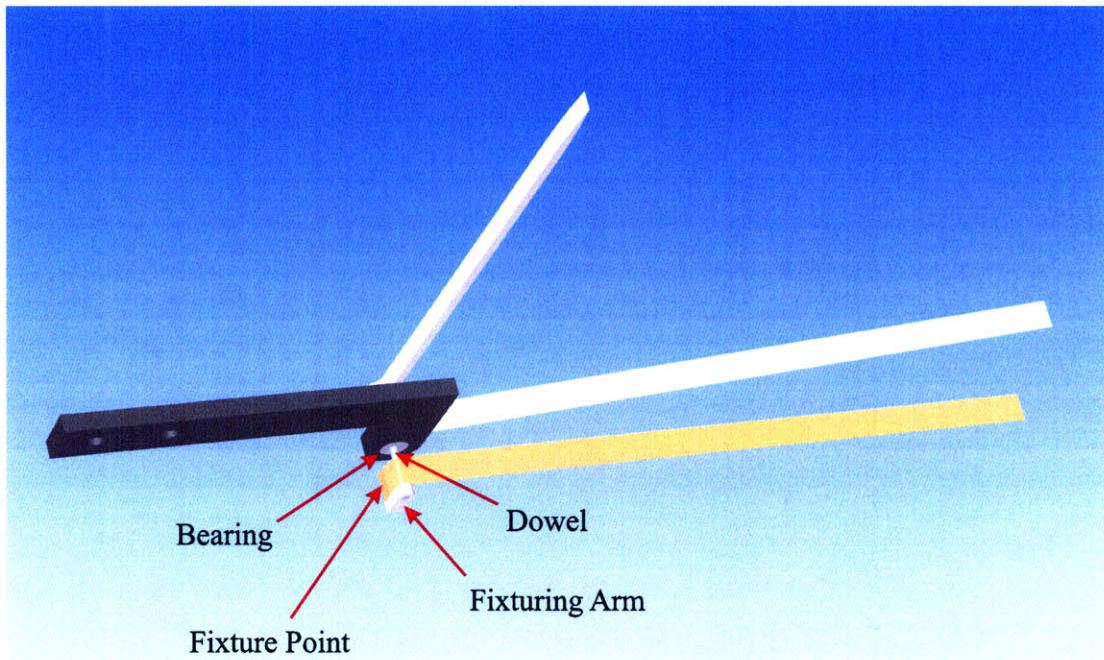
Bottom view of a design for rotationally actuating a fin ray.
